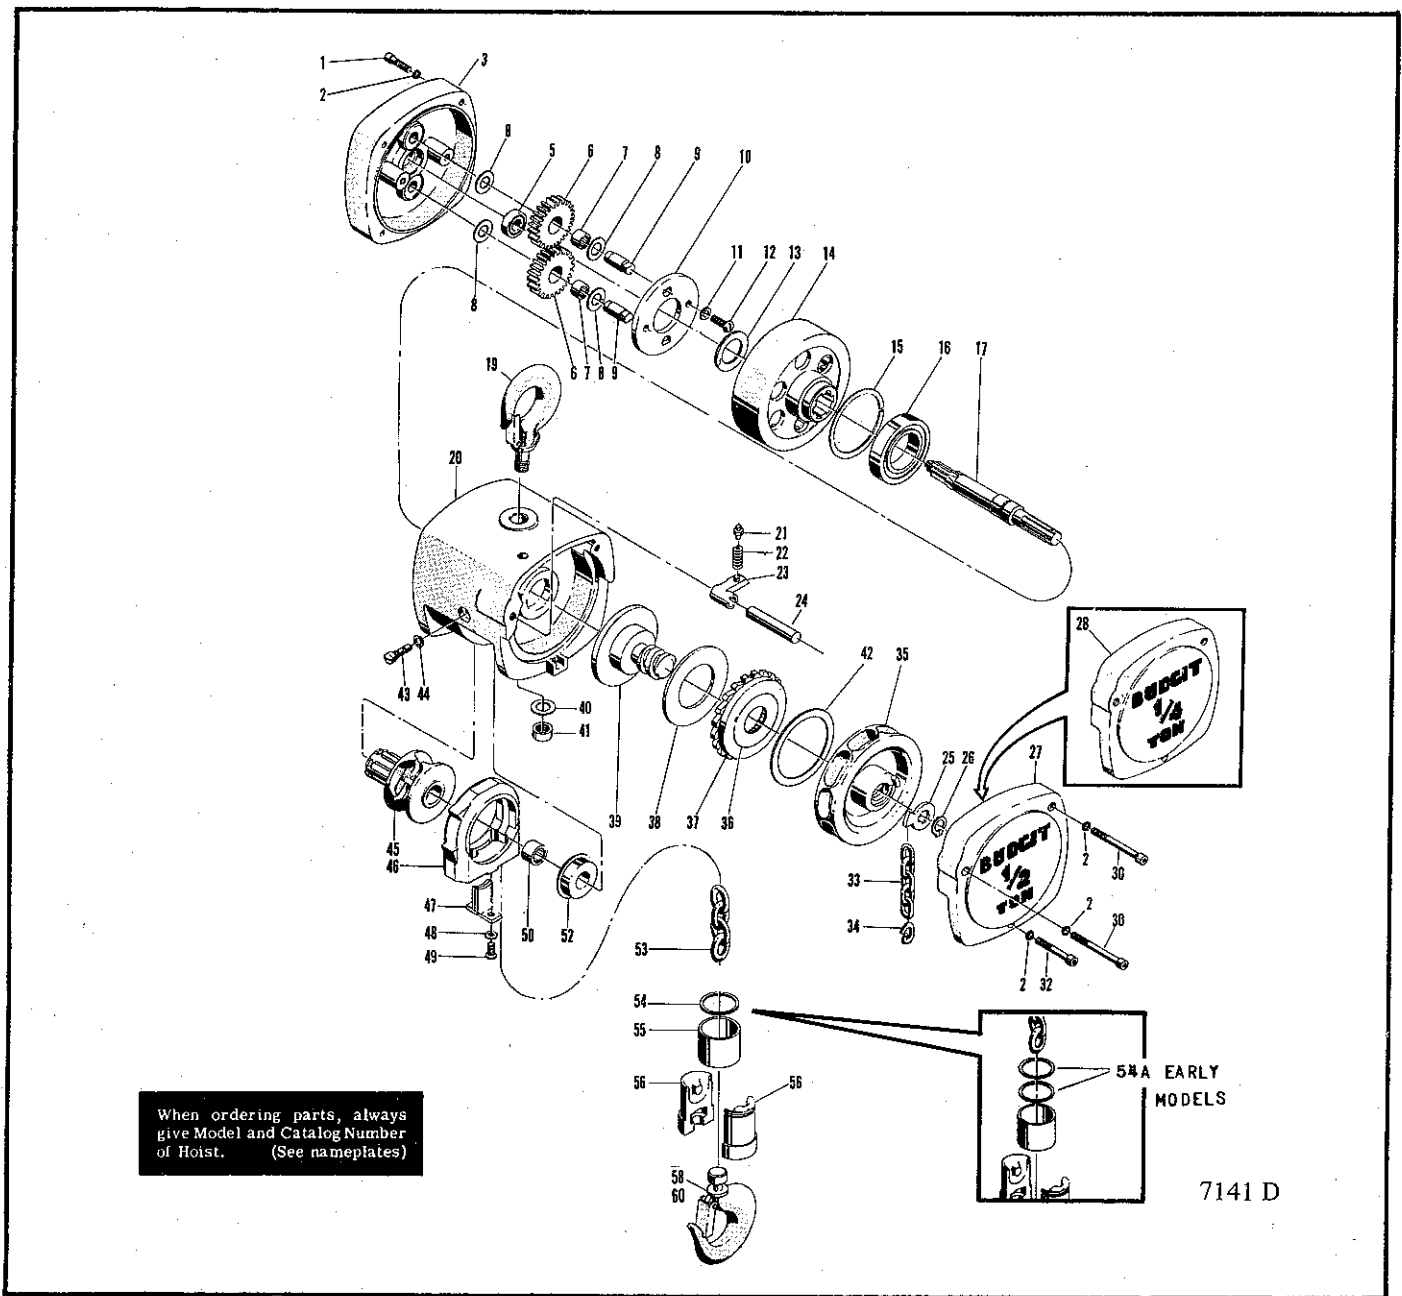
EXPLODED VIEW OF 1/4 & 1/2 TON CAPACITY CHAIN HOISTS
